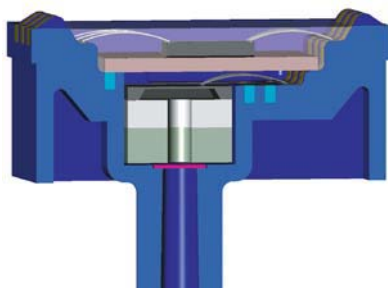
CAD-cross-section through the completed sensor device. Interposer layers minimize stress on sensor chip.
